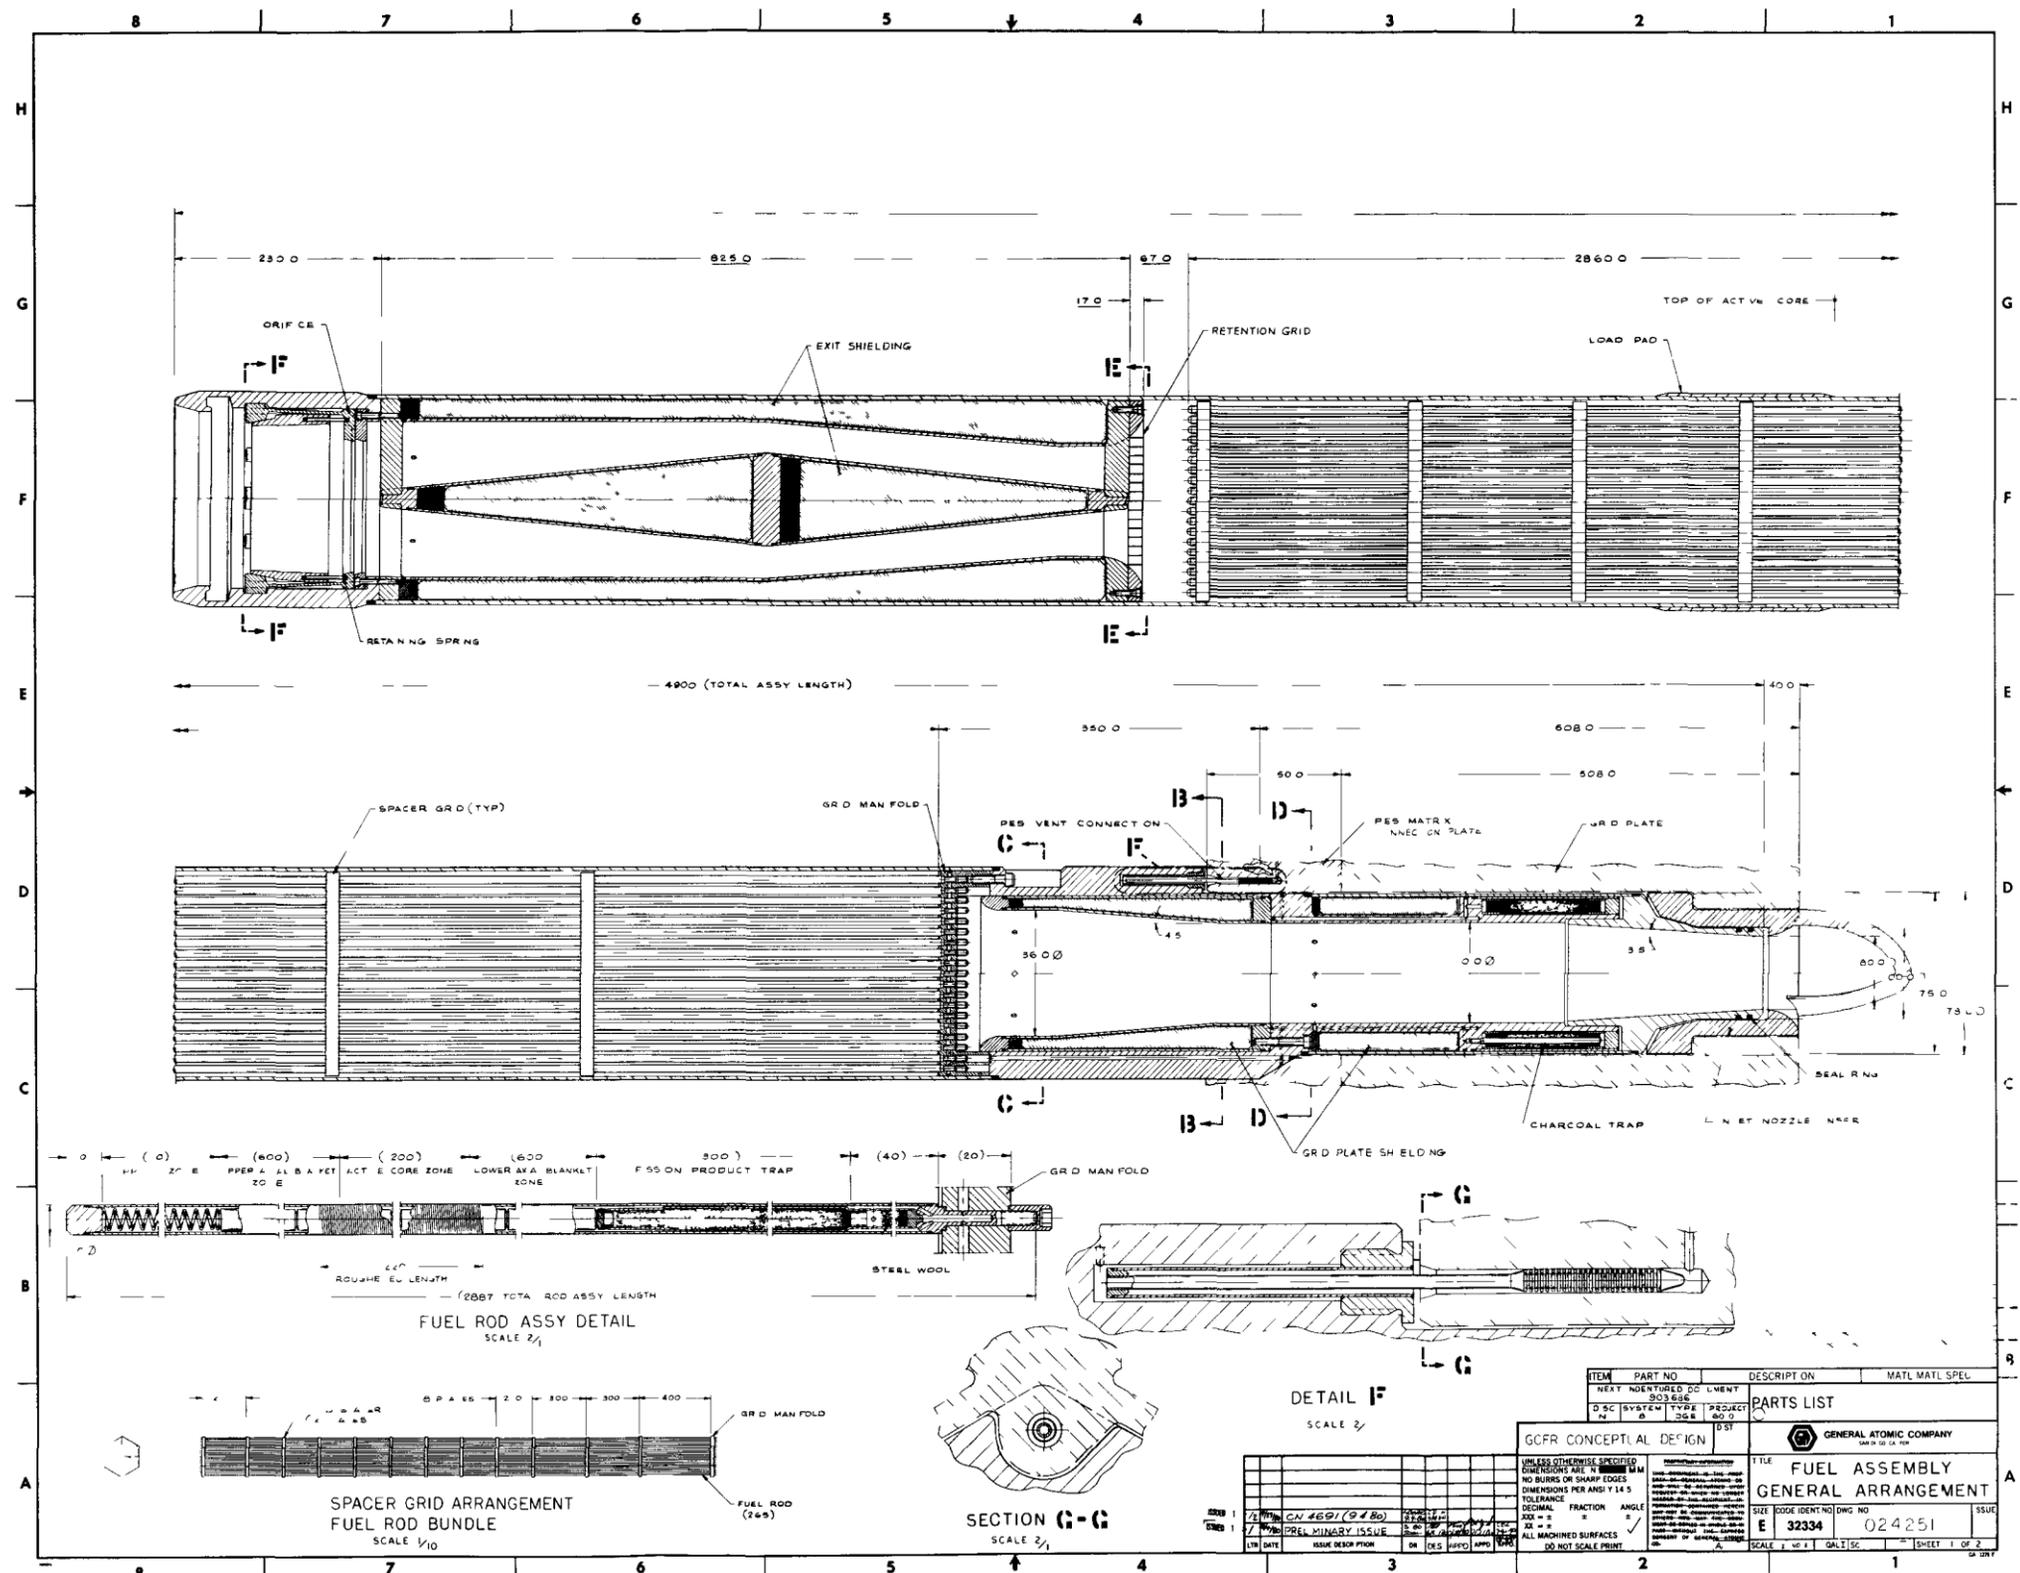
Fuel assembly, general arrangement (sheet 1 of 2)
